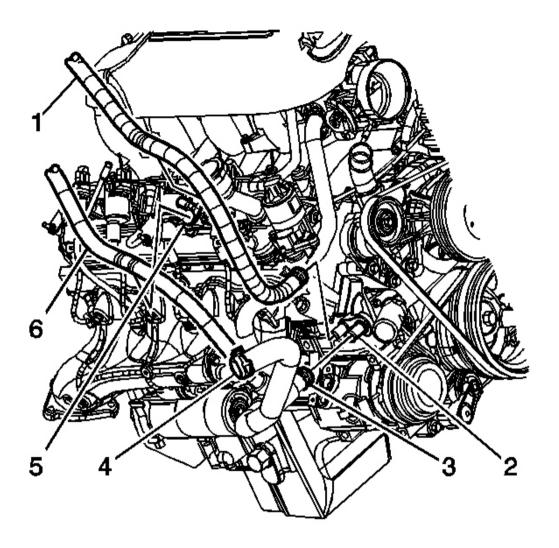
Surge Tank Hose & Engine (Outlet) Courtesy of GENERAL MOTORS CORP.
